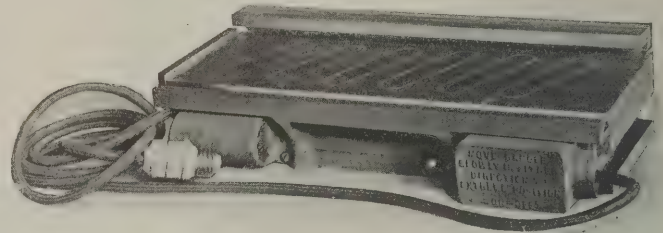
Magnetic Chuck of Flat Type, built by D. & W. Fuse Co.
